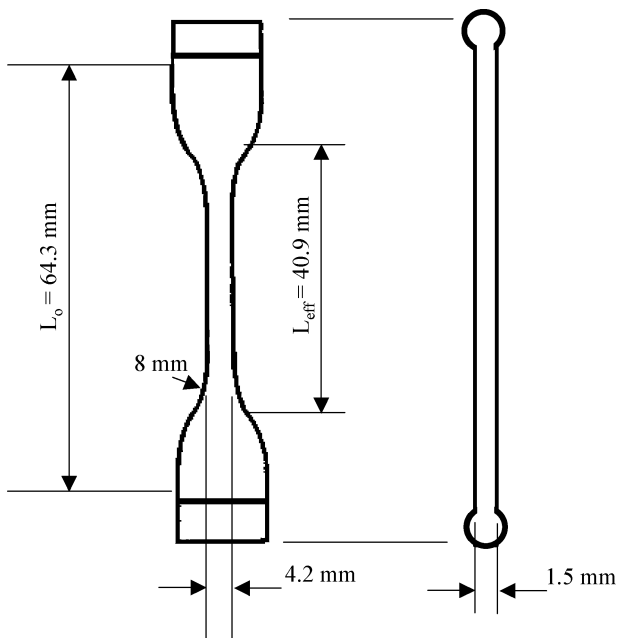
ASTM D4482 simple tension fatigue specimen geometry.
